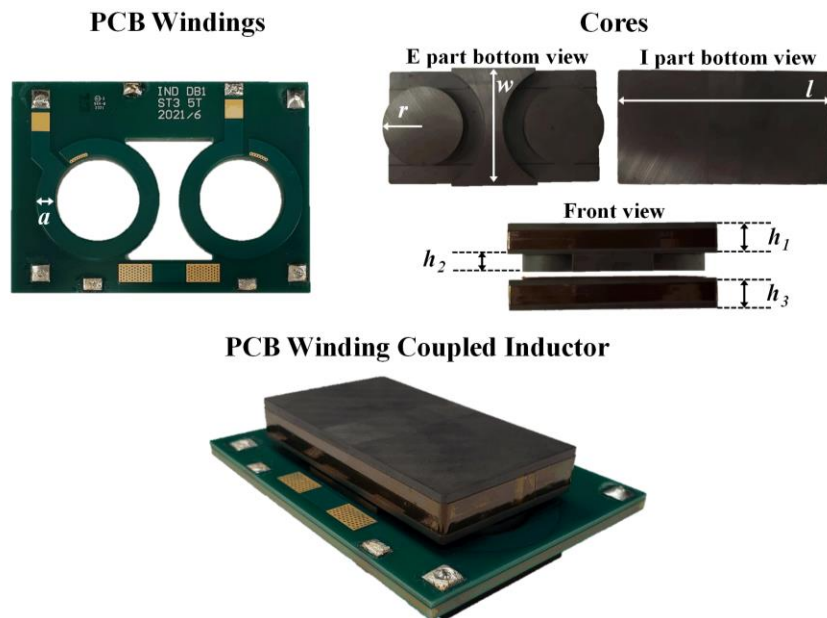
PCB winding coupled inductor teardown and assembled item.
